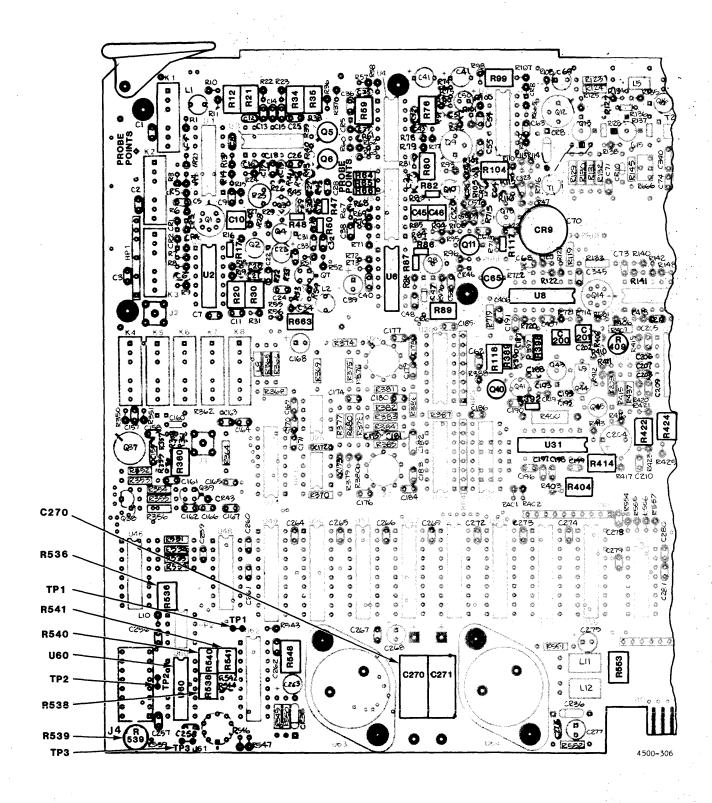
Offset and CAL DAC Adjustment Test Points
